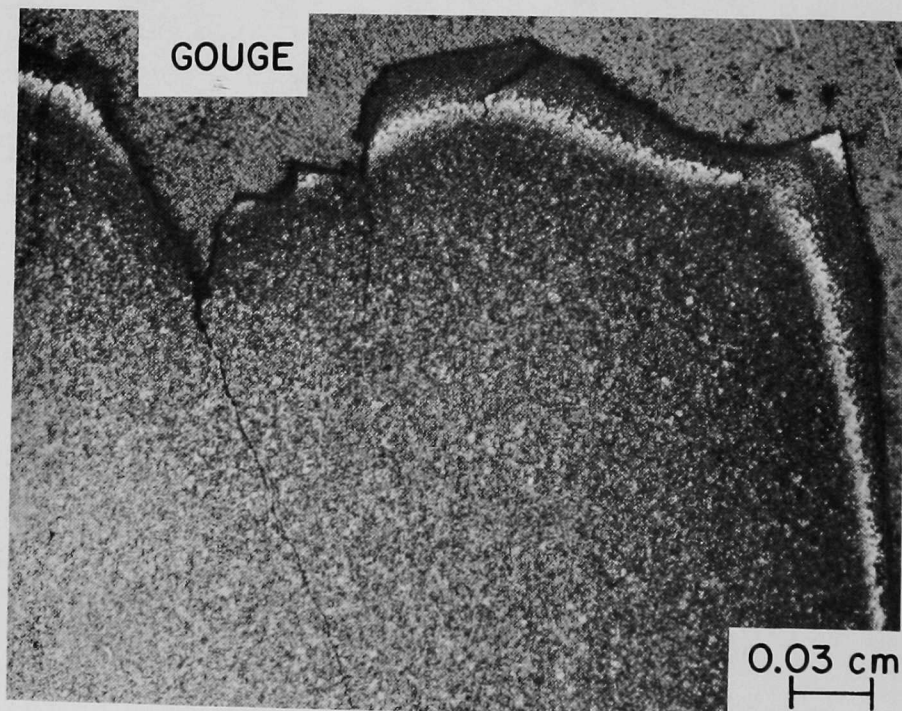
Polished and Etched Surface of HYGAS Valve Assembly Leaf Spring, Showing Cracks Originating in a Gouged Region. Neg. No. ANL-306-78-574
